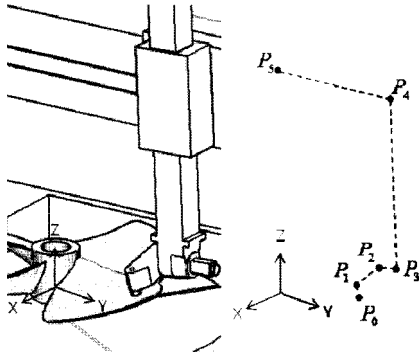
Joint points of 3R-2L type 5-axis machine.
